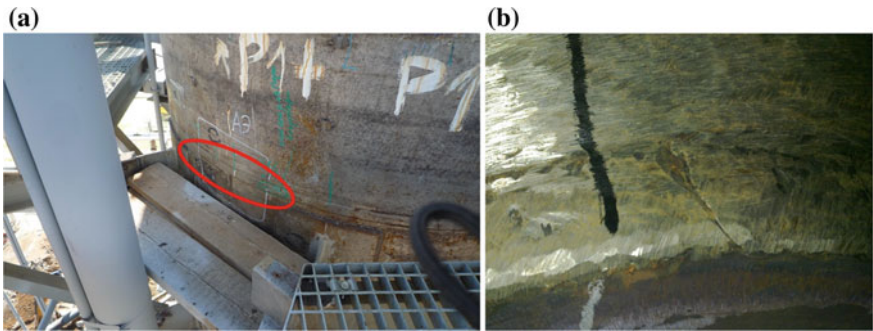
Some photographs of areas for additional testing: a position of Zone 3 on the column shell, b one of welding defect in Zone 5
